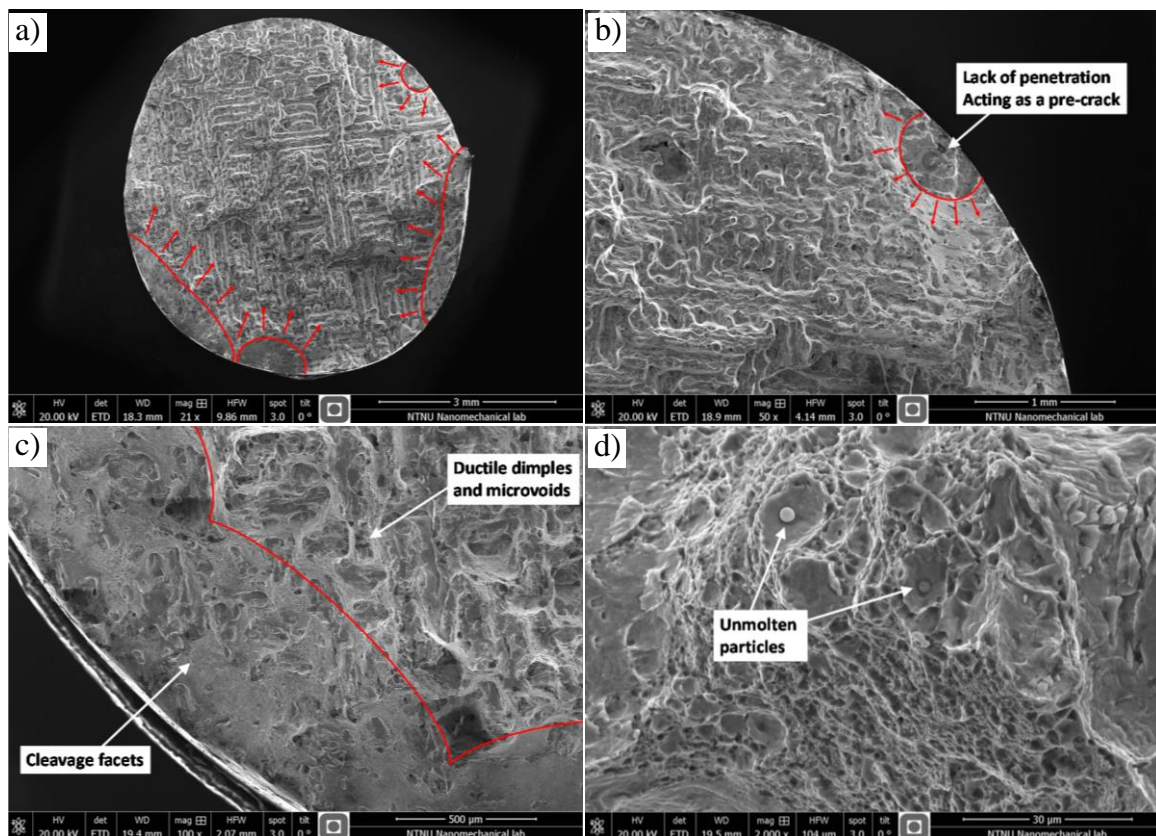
Fracture surfaces resulting from the low-cycle fatigue tests; a) multi-nucleation cracks; b) crack nucleation on lack of penetration defect; c) crack propagation by mixed mode, starting with brittle fracture and passing to ductile fracture when growing in the direction of the specimen's center; d) unmolten particles defect.
